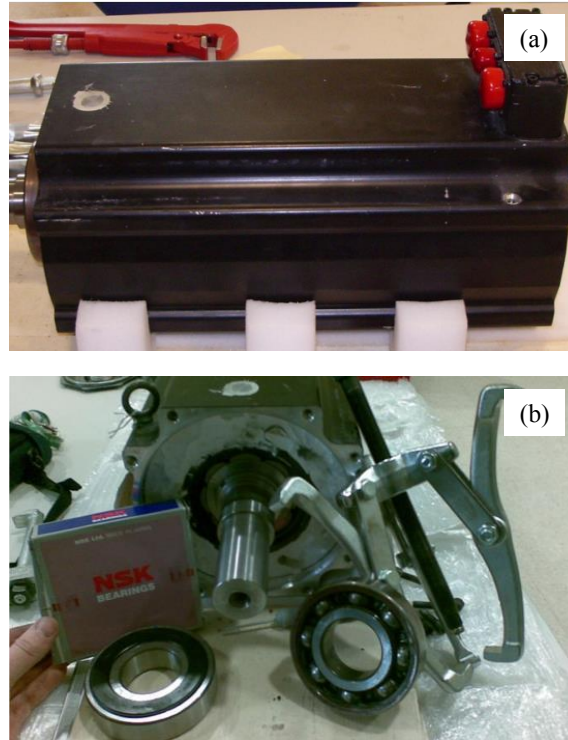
Rockwell Automation MPL-B680B AC brushless motor and NSK 6309 bearing. (a) lateral view of the motor, (b) Frontal view with bearing
